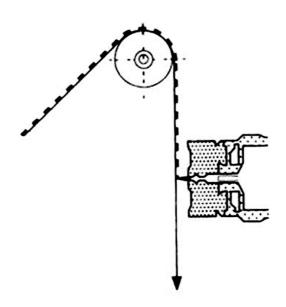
Scheme of fabric singeing machine with flame perpendicular to fabric
